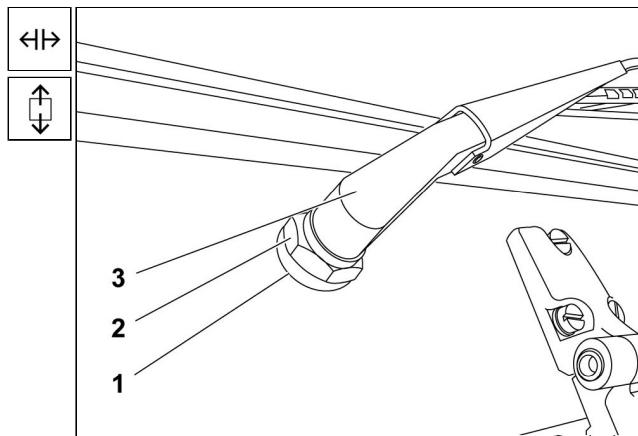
Attachment of the wipers drive mechanism - removal
